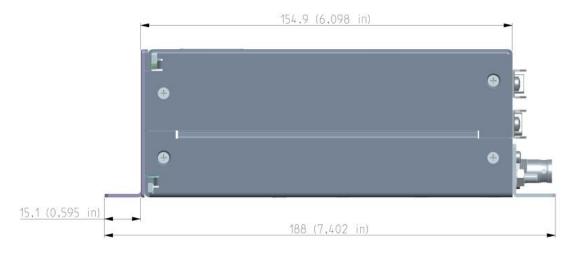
RT6201 side view, dimensions in mm and (inches)
